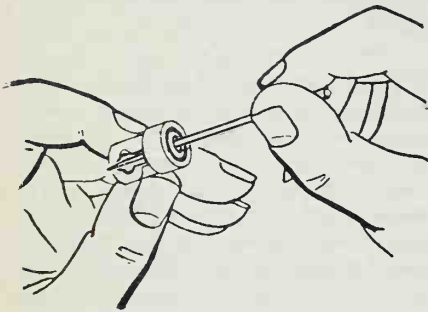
Use a pointed hardwood stick to clean spray hole as shown.
